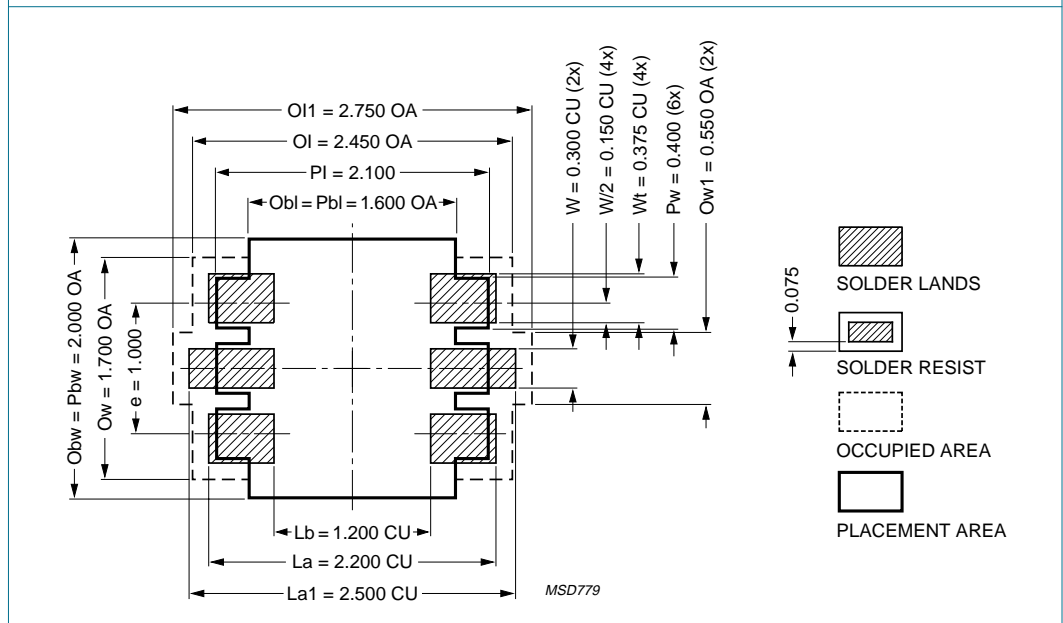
Wave soldering footprint SOT363 (SC-88)
